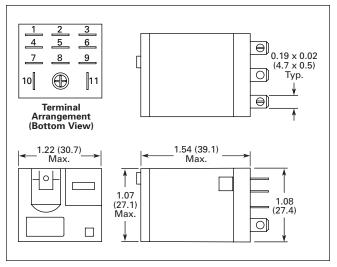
D7PF3 — Approximate Dimensions in Inches (mm)
